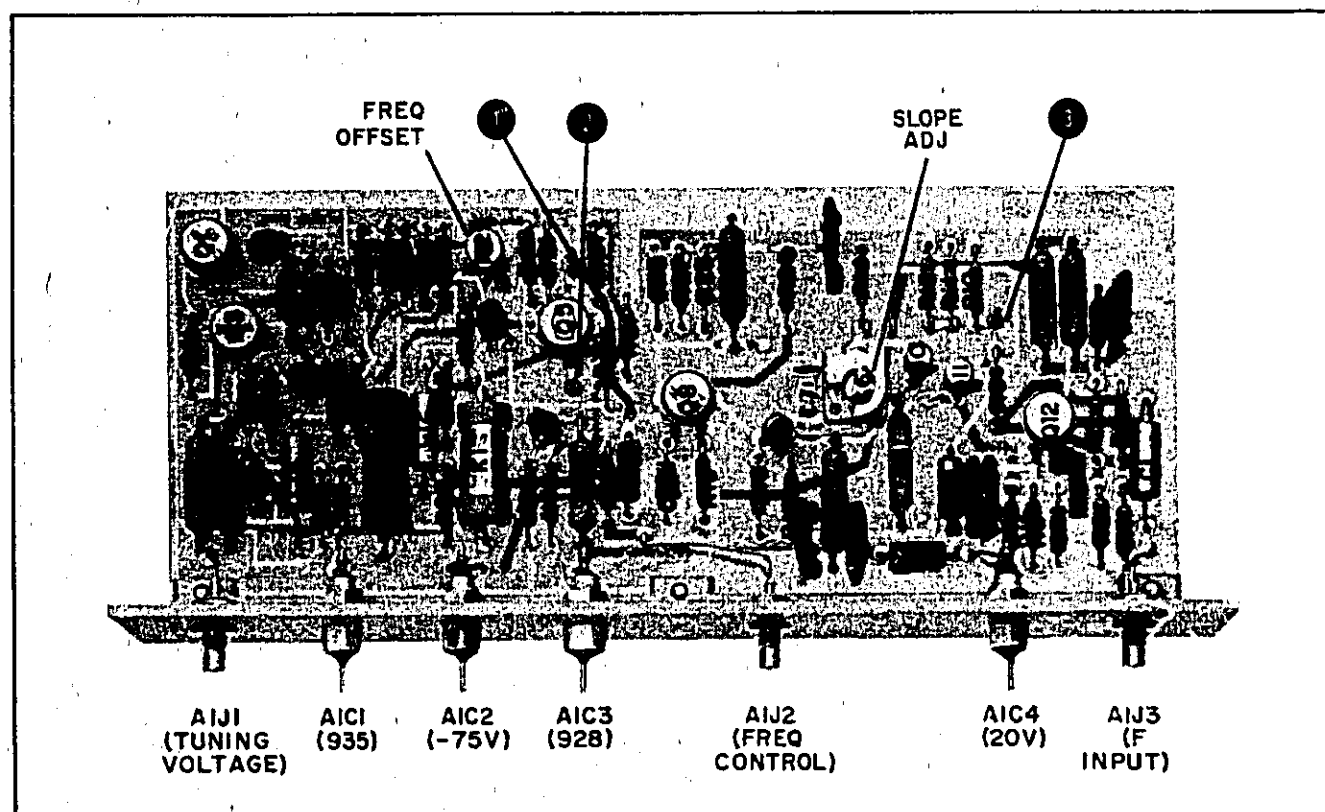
Component Identification A1A1 Discriminator Assembly
